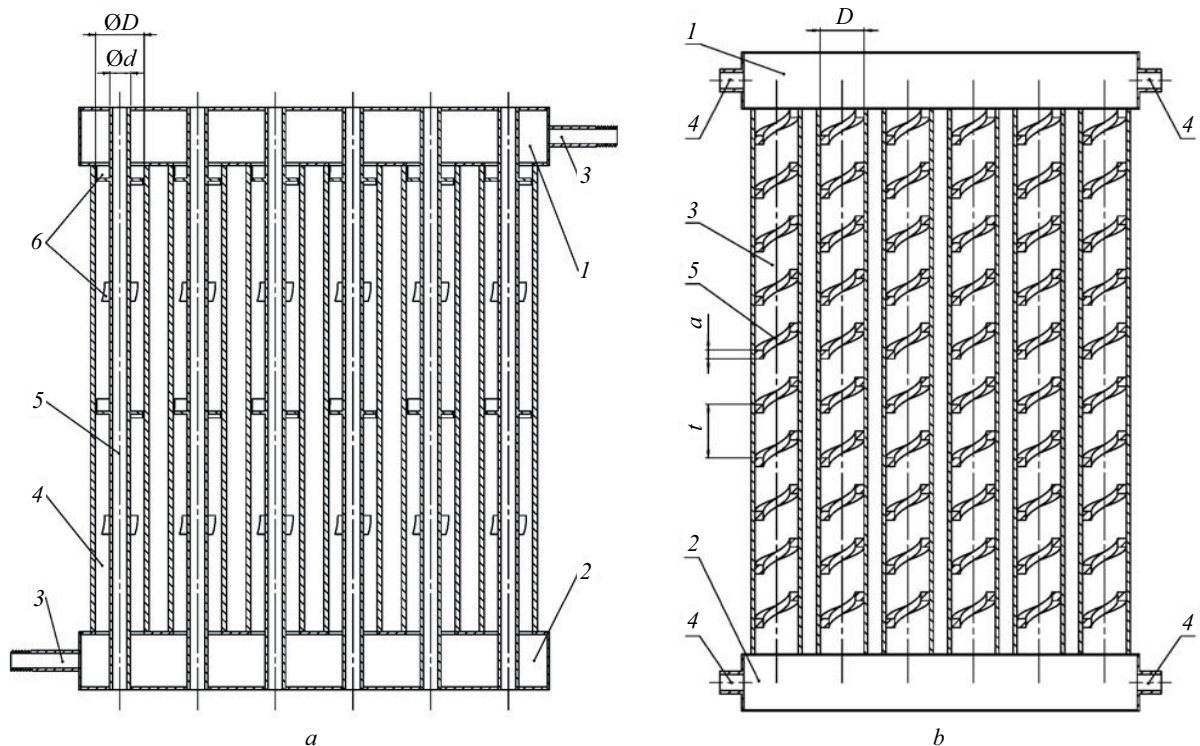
Drawings of the original radiators: a — radiator design with concave plates: 1, 2 — manifolds; 3 — section; 4 — outlet; 5 — inner pipe; 6 — turbulator; b — radiator design with spiral inserts: 1, 2 — manifolds; 3 — section; 4 — coupling; 5 — inner pipe
